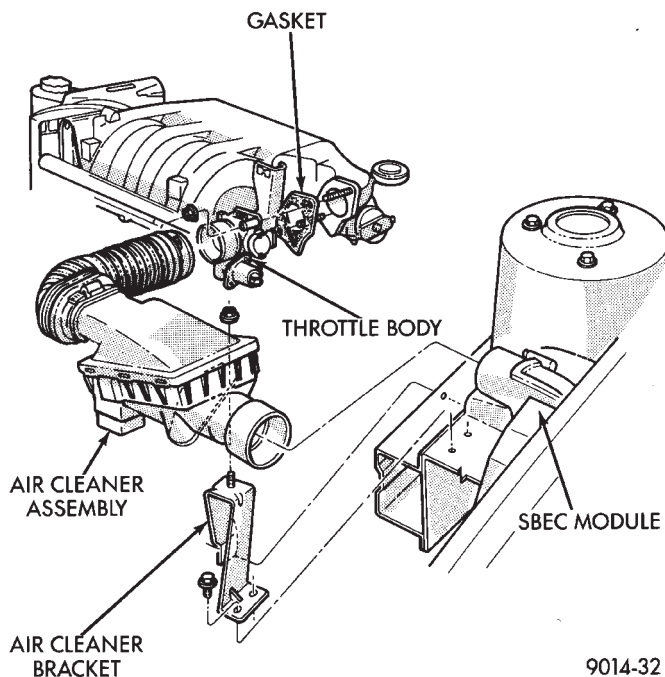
Throttle Body Assembly—3.3/3.8L Engines
